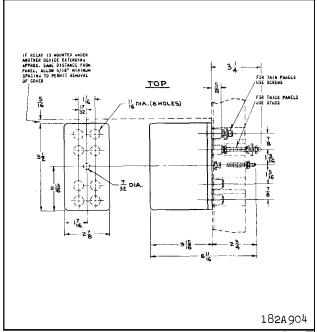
Outline and Drilling Plan for the Type TR-1 Auxiliary
